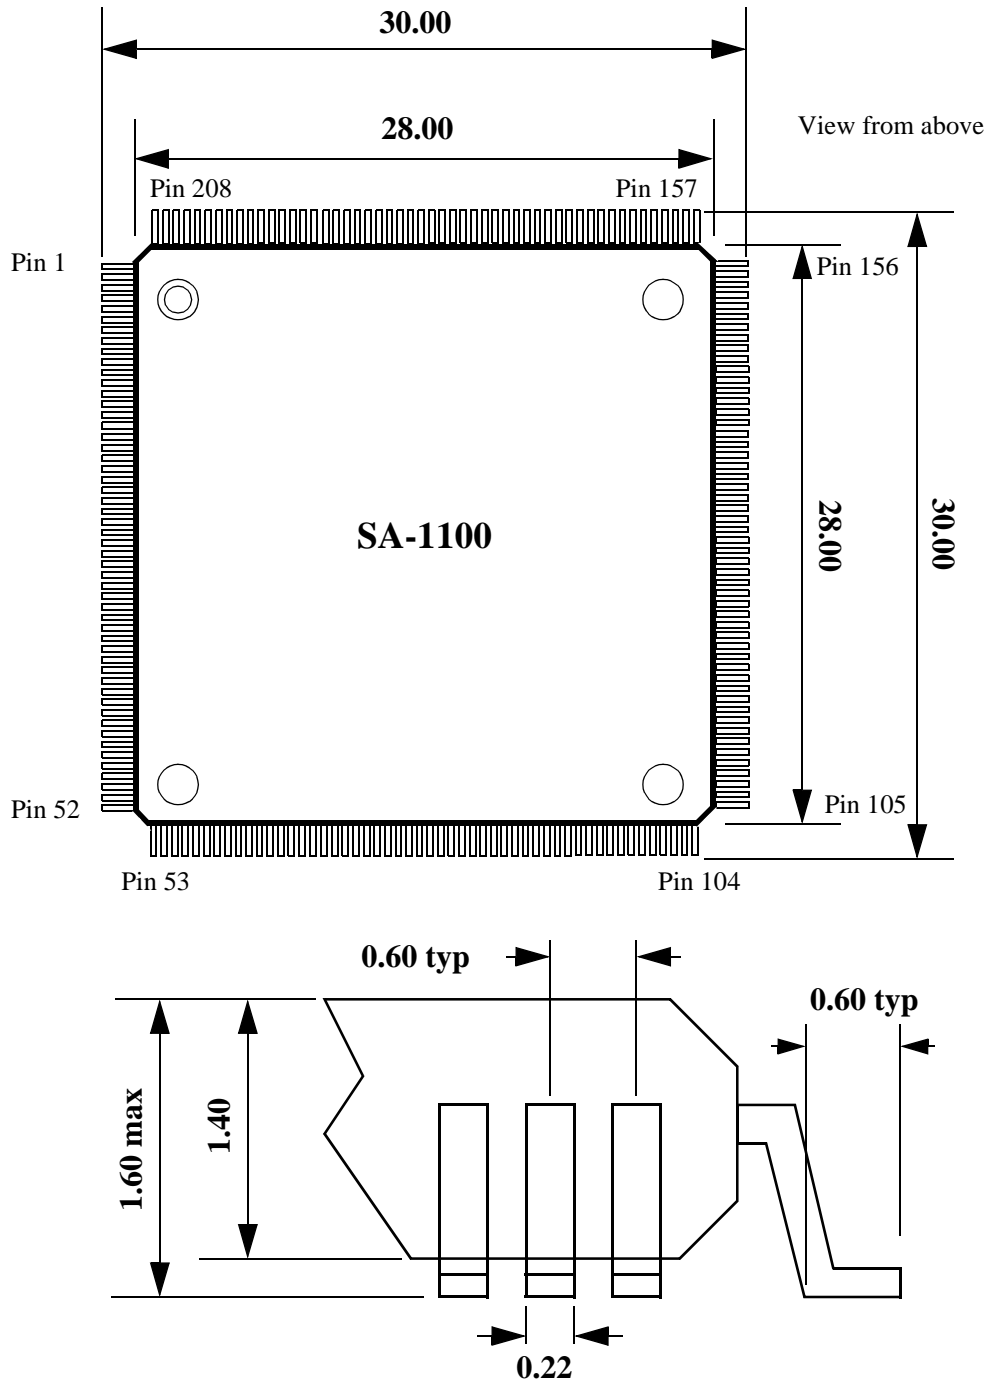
SA-1100 208-Pin LQFP Mechanical Drawing
